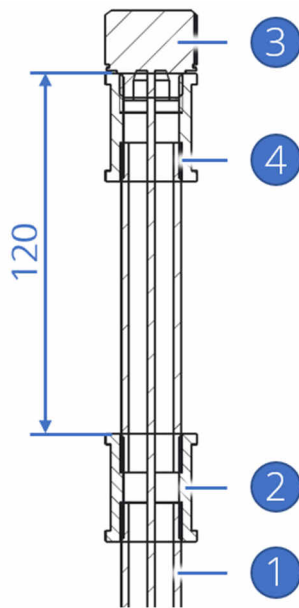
mechanical oil dipstick – installation angle 38,2°
